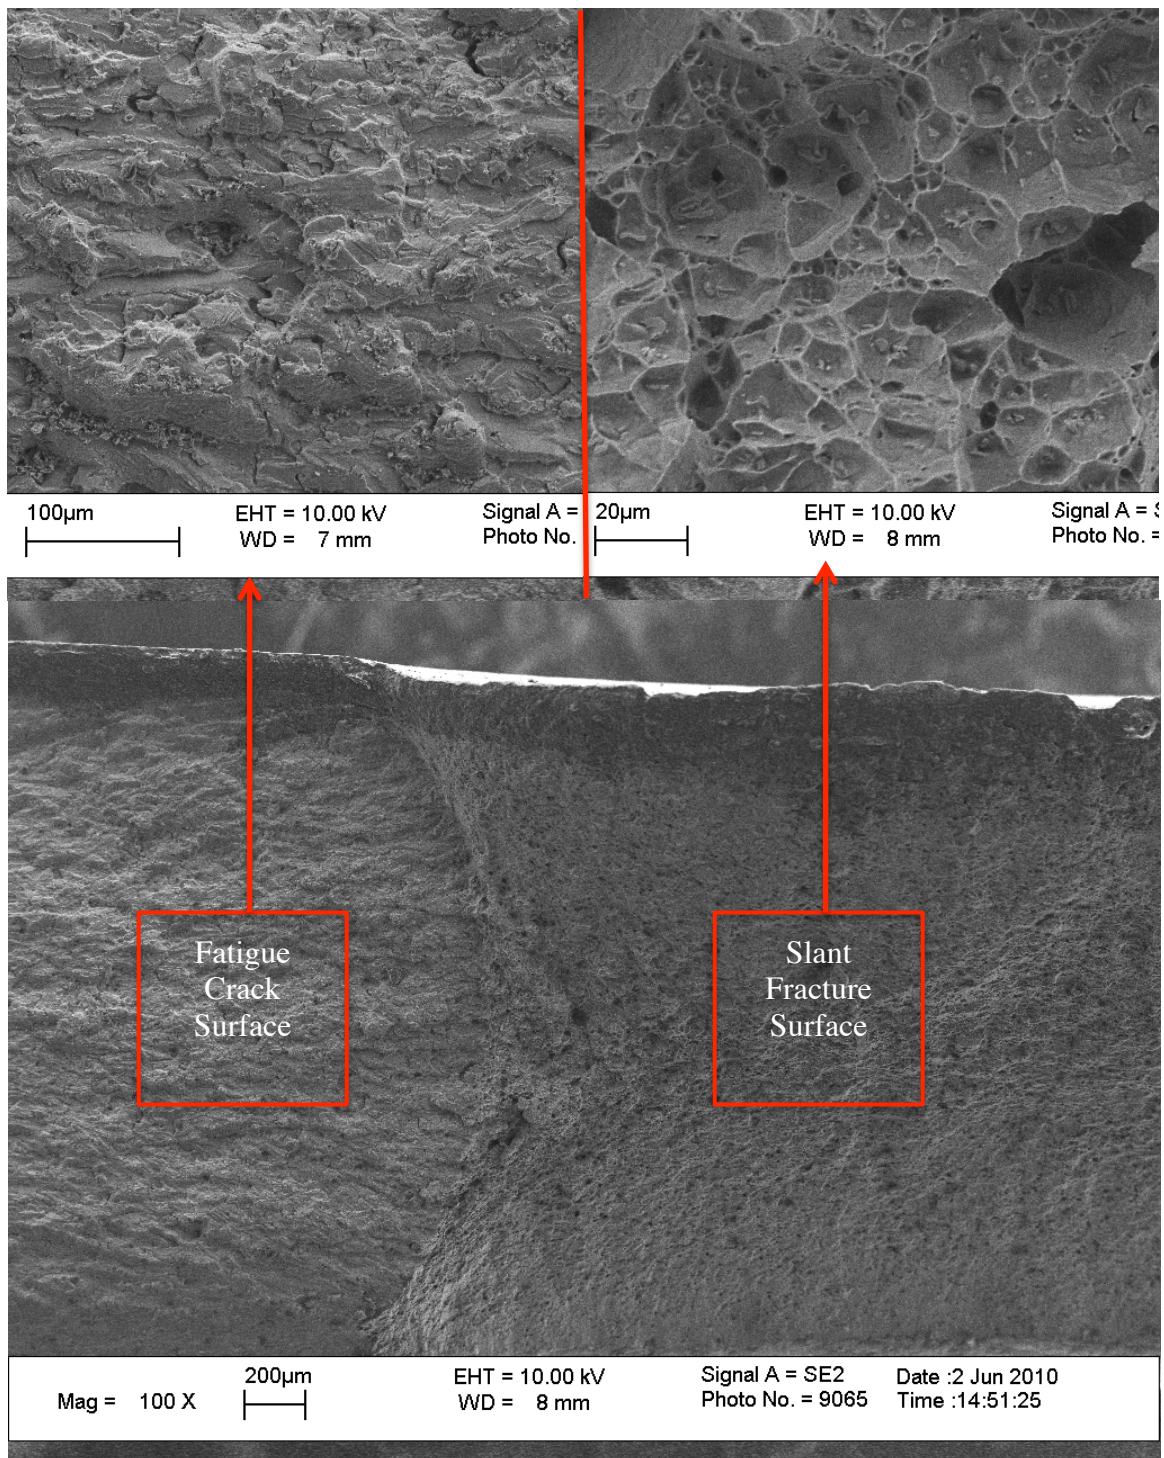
Fracture surface of Al 6061-T6
